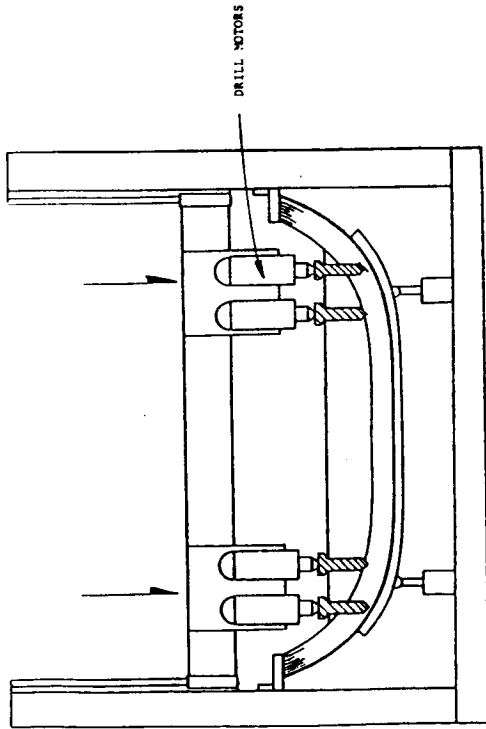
Holes For Studs Drilled By Multiple Drill Jig (Production Configuration)
